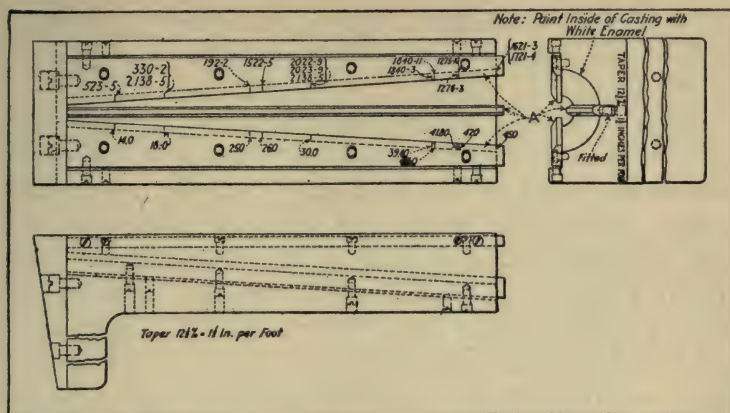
FEMALE MASTER GAUGE FOR TESTING MALE TAPER GAUGES
